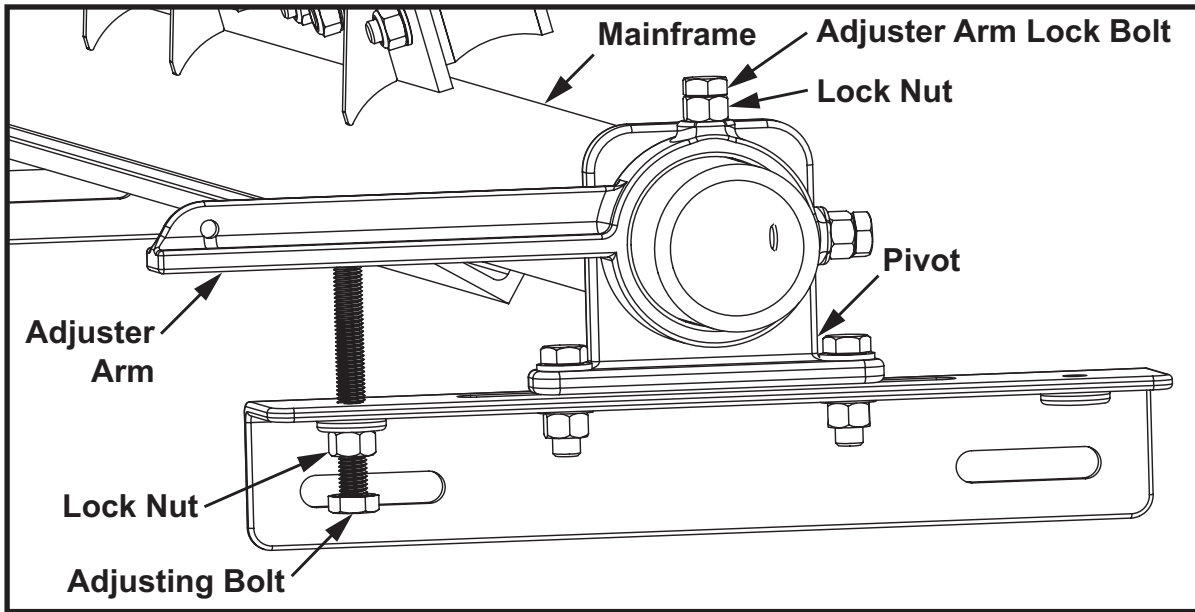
Martin® H1 Primary Belt Cleaner HD Adjuster Arm
